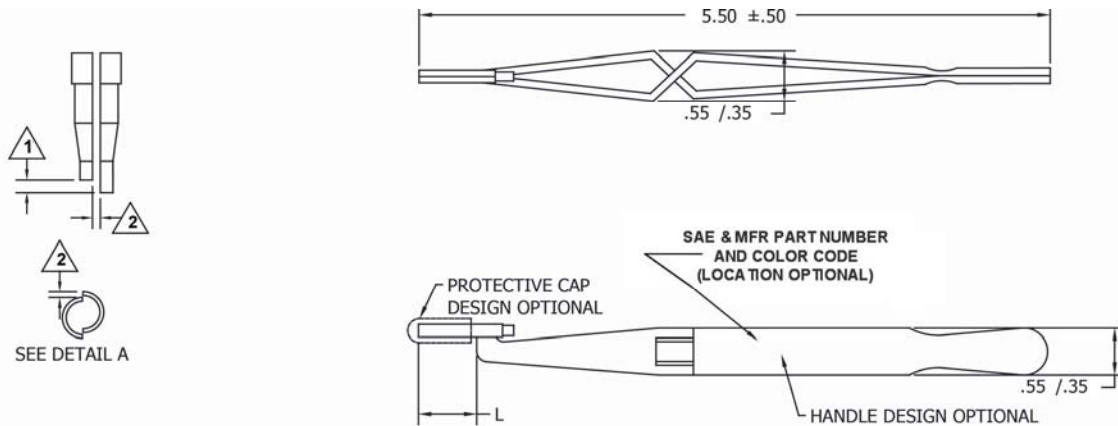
INLINE PROBE REMOVAL TOOL CONFIGURATION
